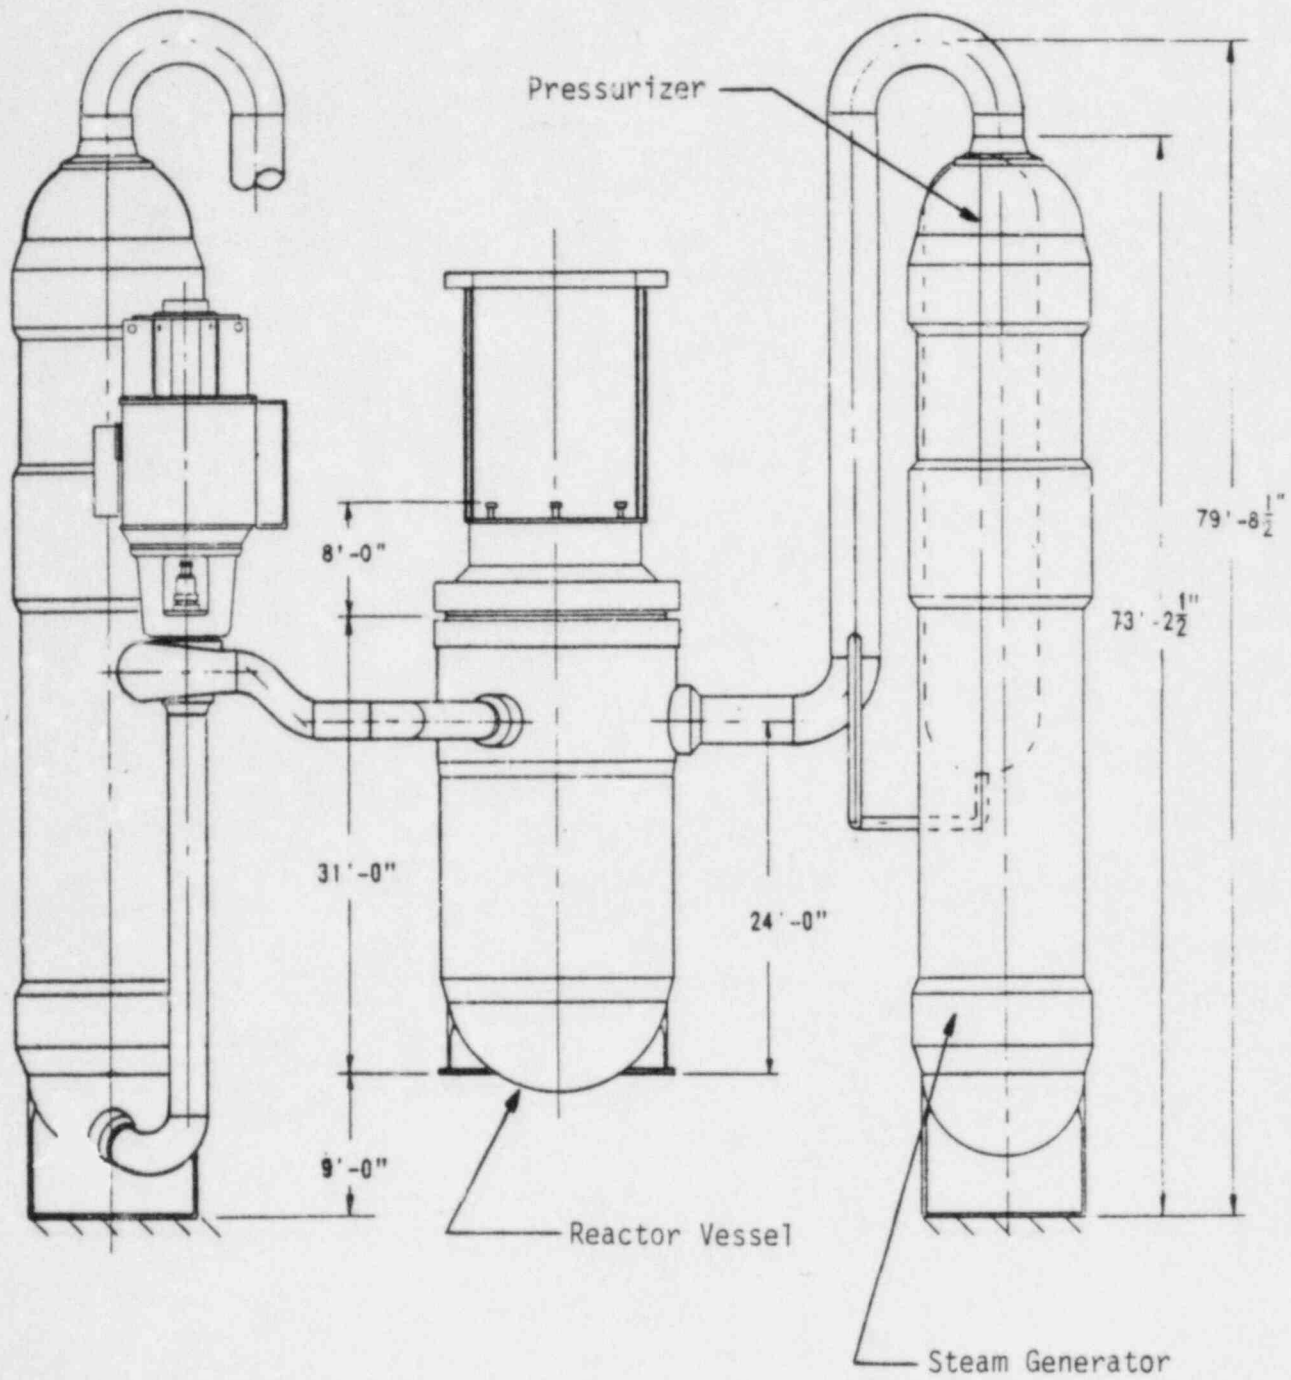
Typical Raised Loop Reactor Coolant System Arrangement - Elevation
